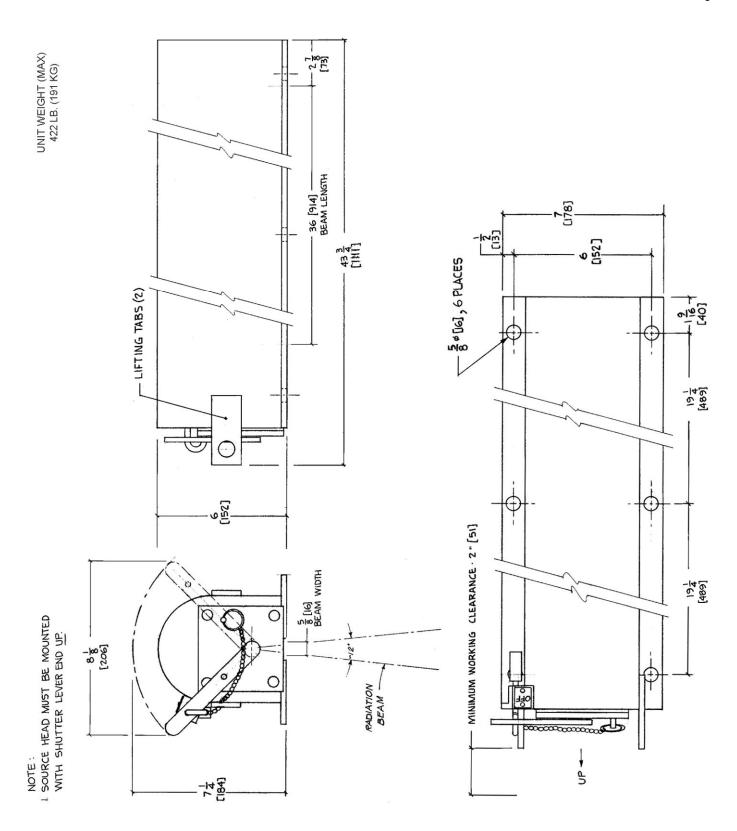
860483: Mounting dimensions – Model 5196 strip source, 3 ft, 1000 mCi (sheet 1 of 1)
